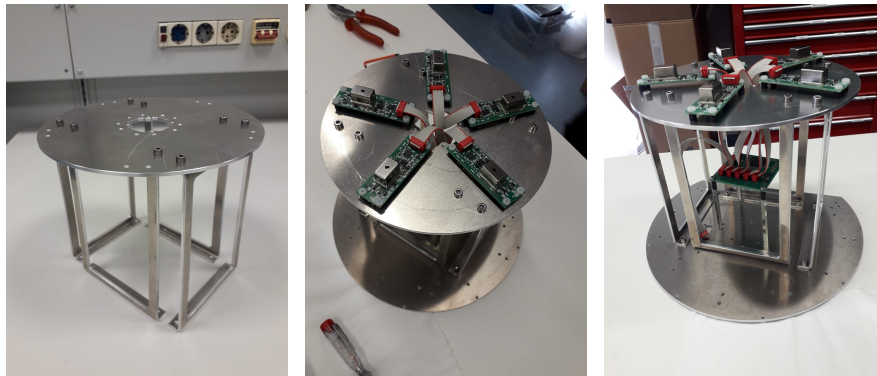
Final assembly of the Minispectrometer Module internal mounting. On the right picture is visible that the "Bridgette" board is fixed between the two aluminum plates with four spacers screwed on the bottom plate.
